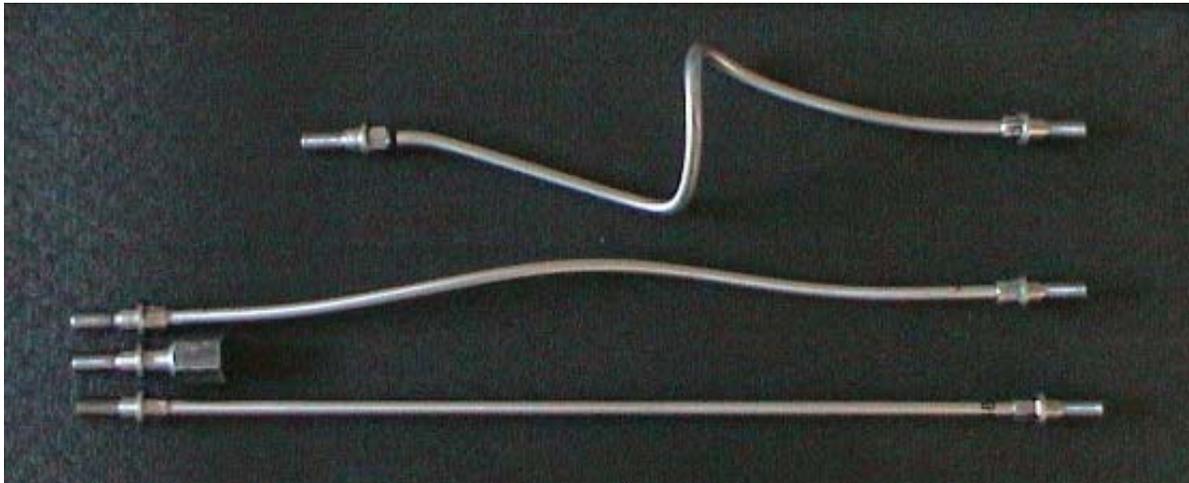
Bottom to top: Straight flex shaft, flex shaft thread test sample, slightly bent flex shaft, severely bent flex shaft. Length of straight shaft is approximately 26 inches end to end.
